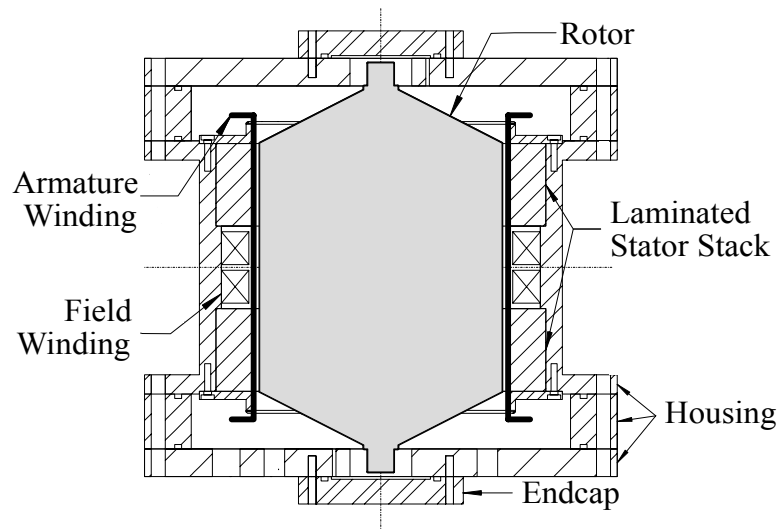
Cutaway view of homopolar inductor motor flywheel system.
